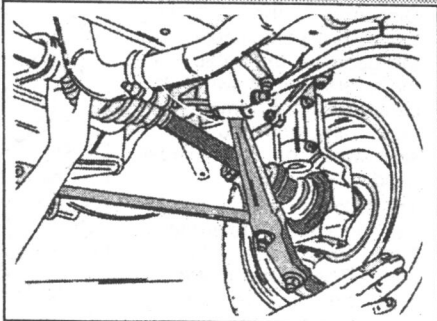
Removal of the R.H. drive shaft. Push the wheel towards the outside, until the tri-axe joint can be removed from the support bearing.
